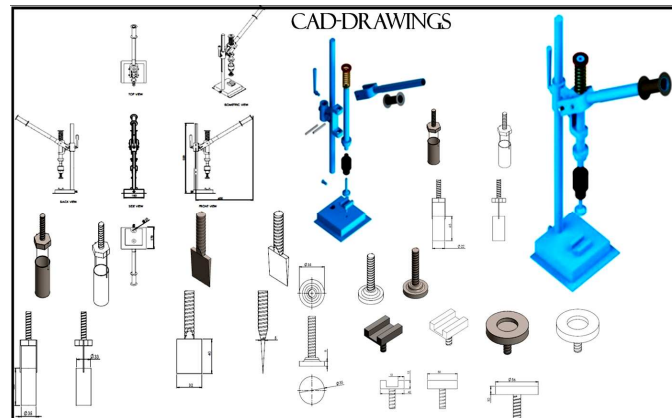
Cutting Tool Design & Drawings for MNP Machine
